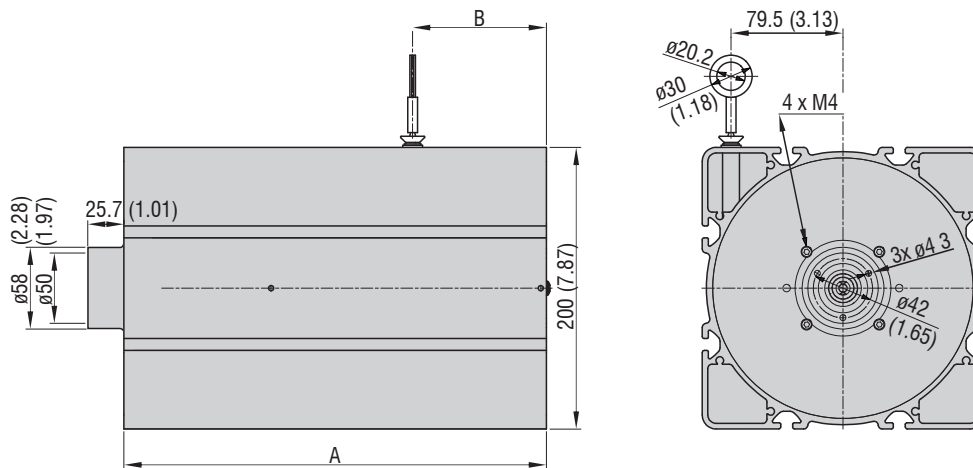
WDS-P200-M, dimensions in mm (inches), not to scale
